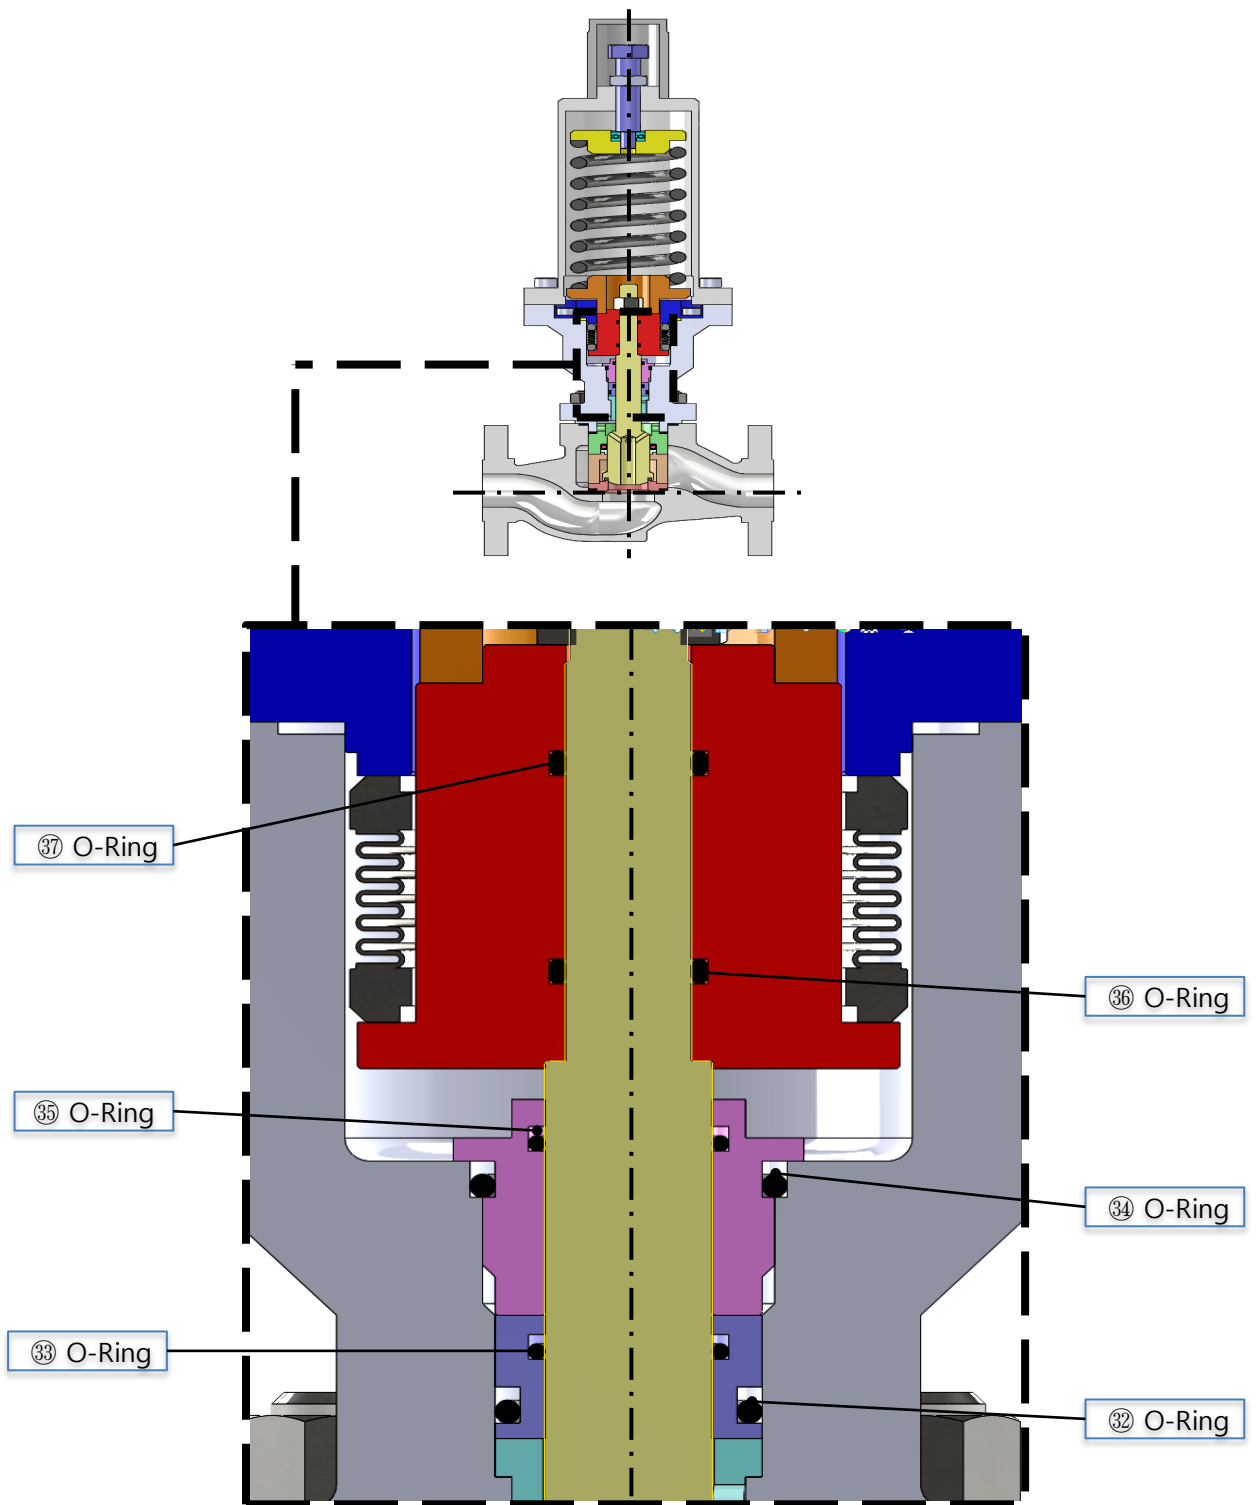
Assembly Sectional Drawing (Gas Type)
